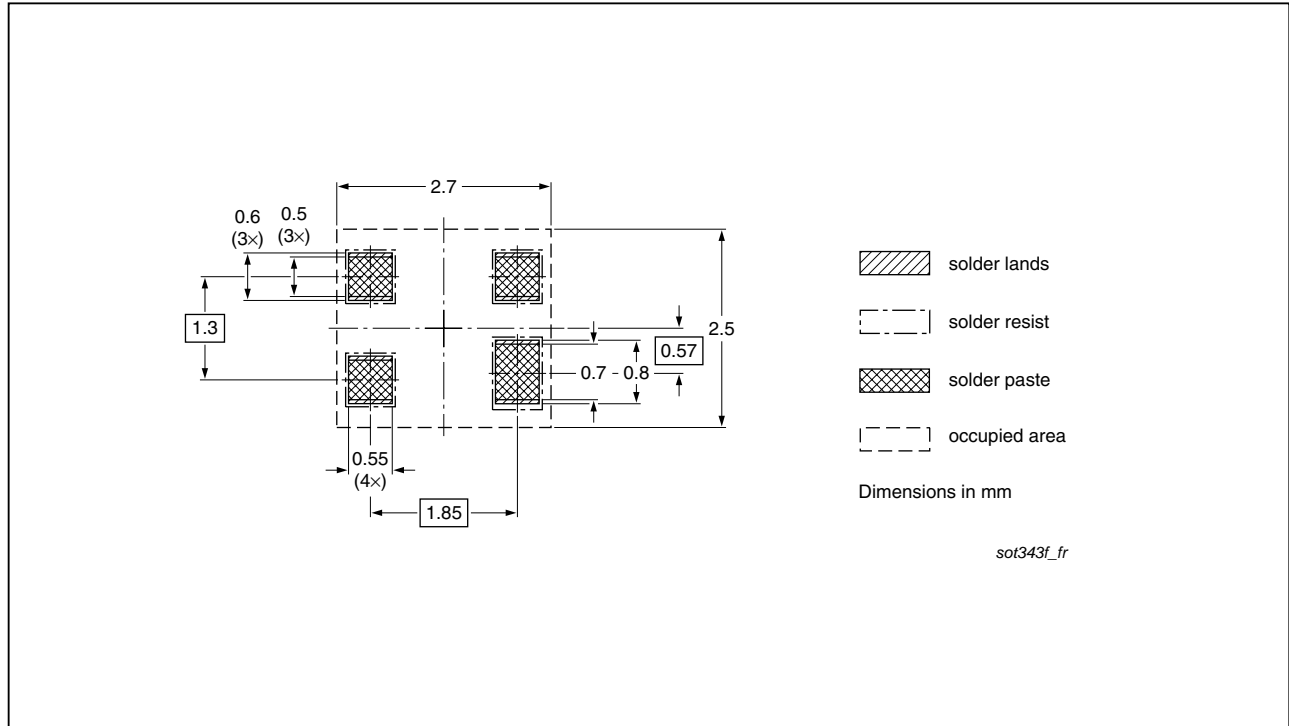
Reflow soldering footprint for SOT343F (DFP4)
